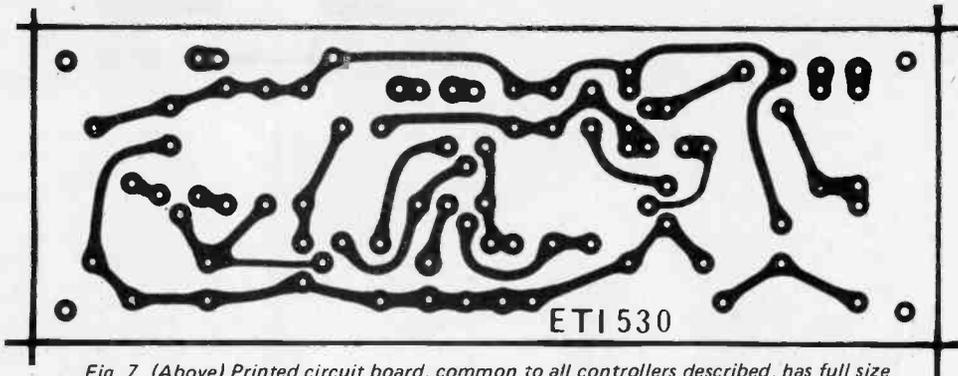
(Above) Printed circuit board, common to all controllers described, has full size dimensions of 120 x 41mm.
